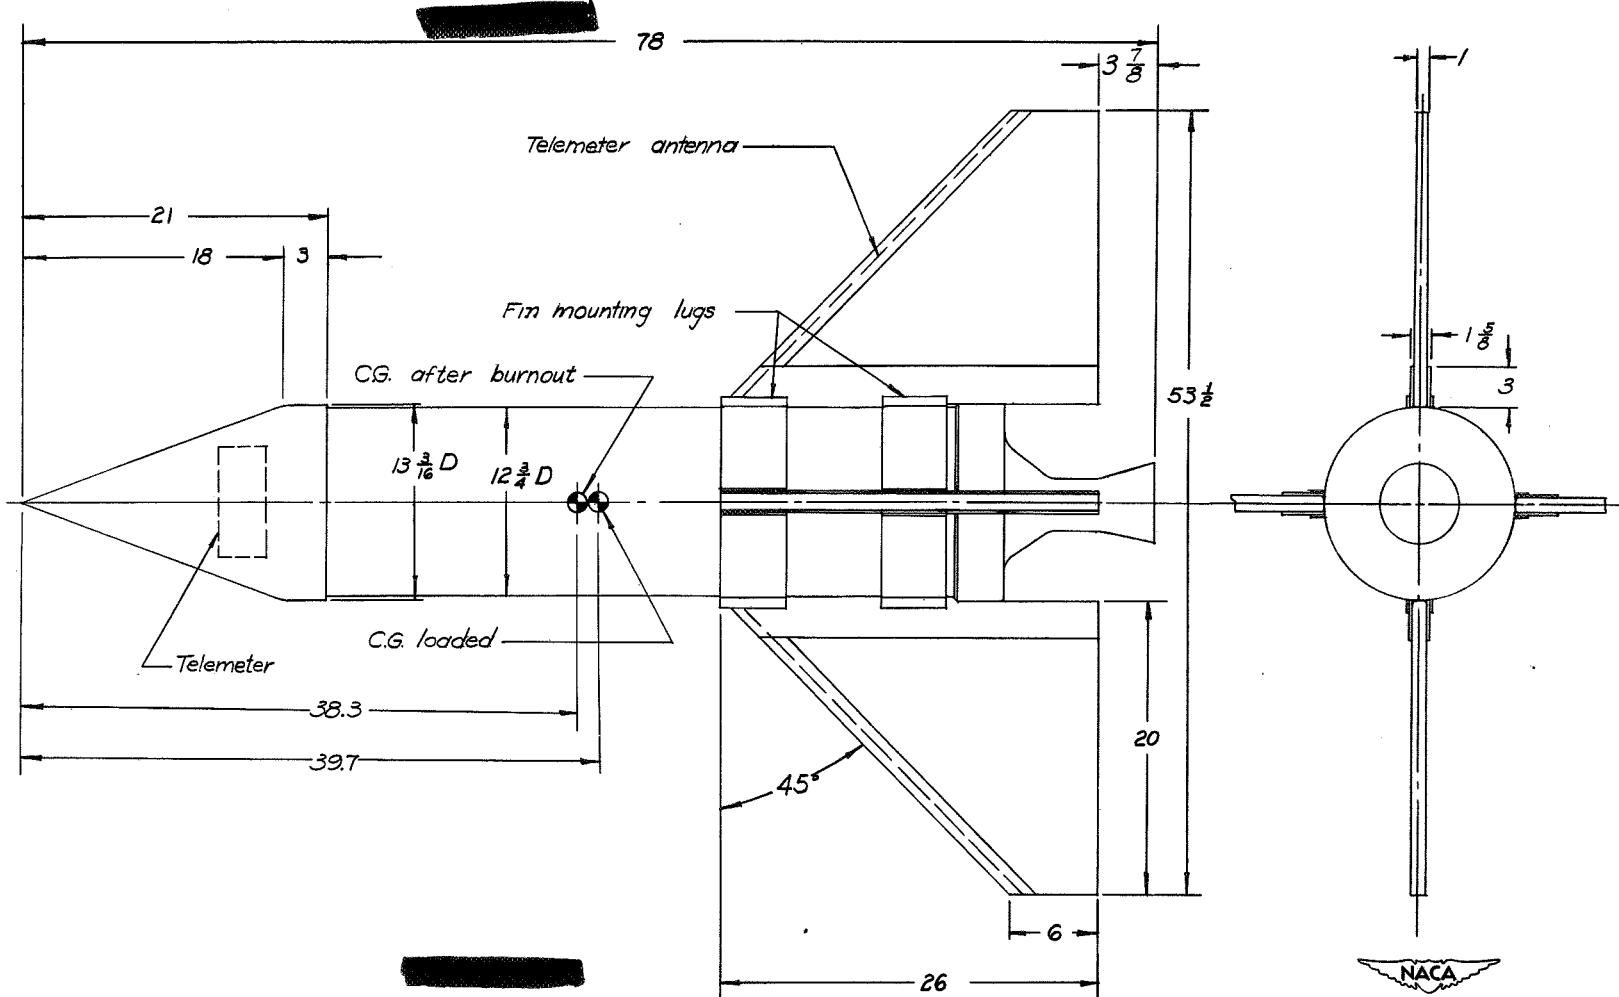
External configuration of Aerojet Jato 7KS-6000 T-27 rocket-motor flight model.
